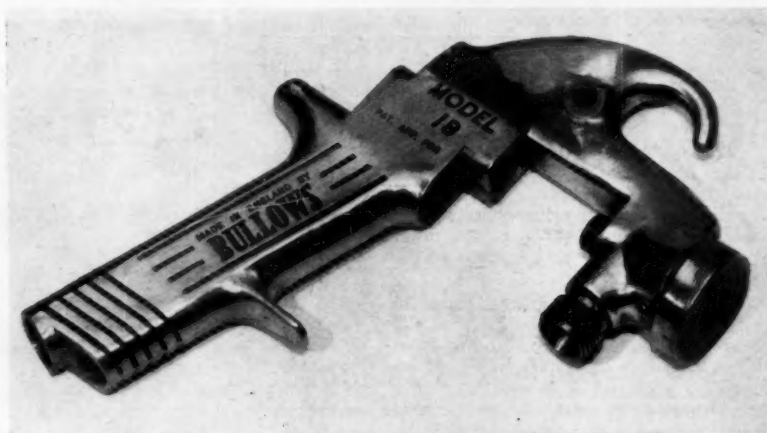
Another spray gun handle, previously sand cast in aluminium alloy now produced as a die-casting in zinc alloy
